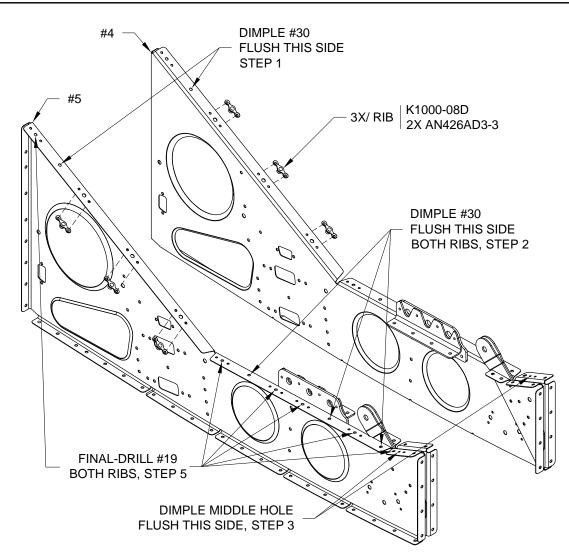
PREPARING SEAT RIB ASSEMBLIES
